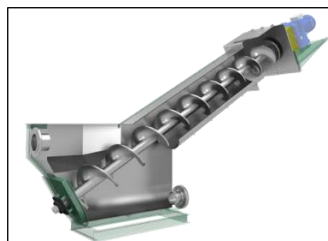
Screw Conveyor Mechanism in pulp extraction machine [18]
